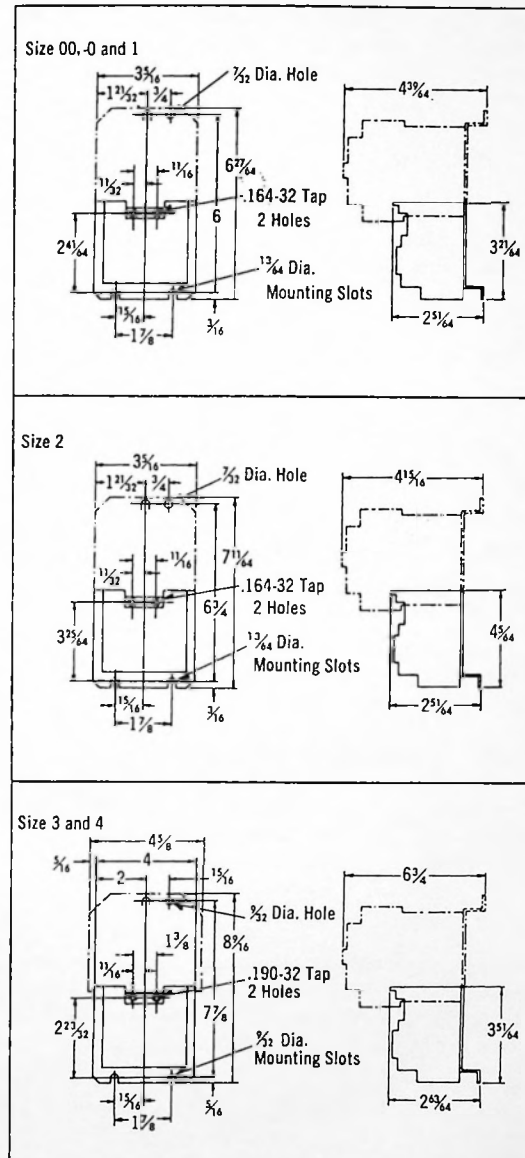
Mounting Dimensions for Latched A/200 Contactors
